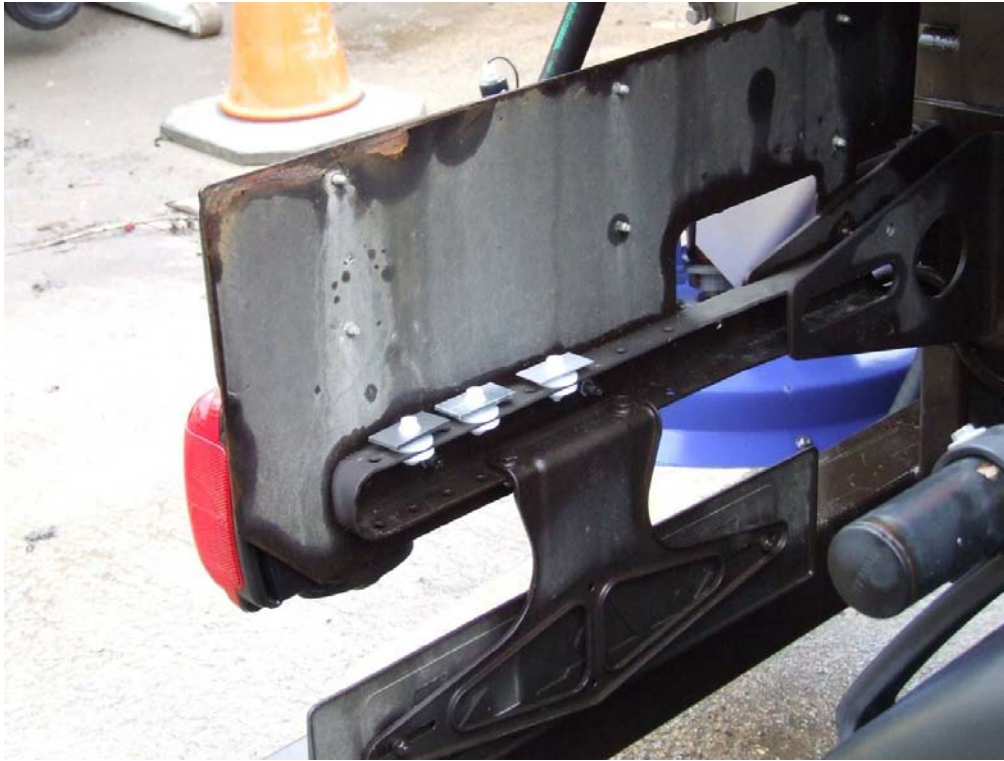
Rear of rear light bank, licence plate and chevron fixing assembly on Schmidt vehicle
